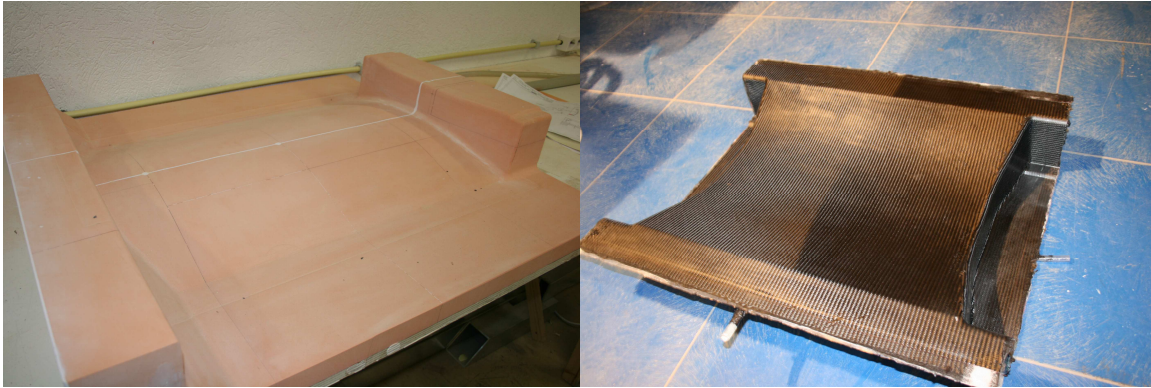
Roof connectors mould and one of the 8 roof connectors manufactured
